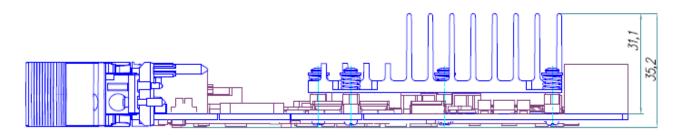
CPC510-02 Board with the installed heat sink R1 (4HP) and MIC590
